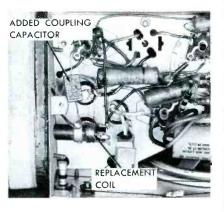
Partial Bottom View of Radio Chassis Showing New Oscillator Coil and Coupling Capacitor.
